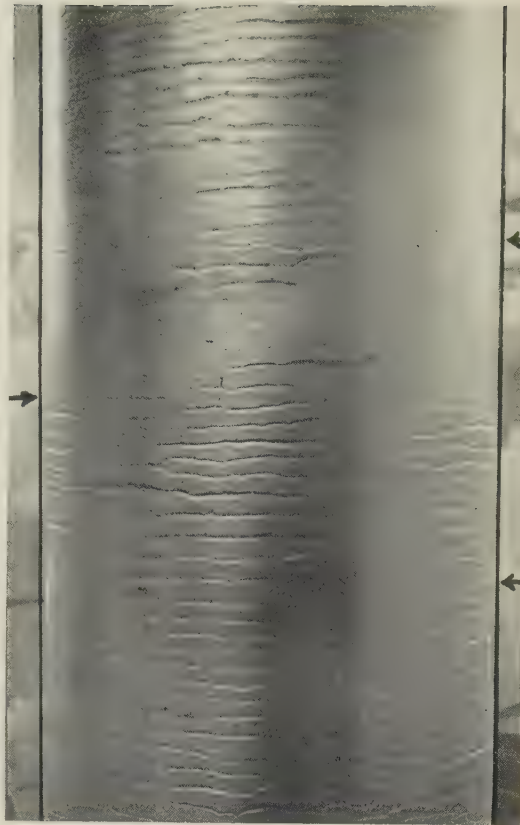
FIG. K.—Surface Appearance of Billet Shown in Fig. H. (Lewis.)
